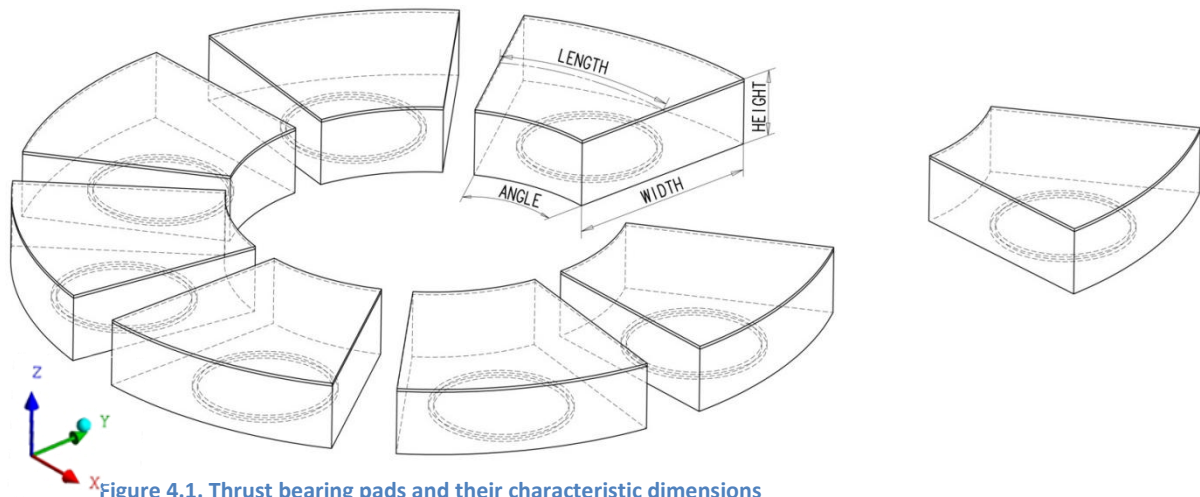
Thrust bearing pads and their characteristic dimensions
